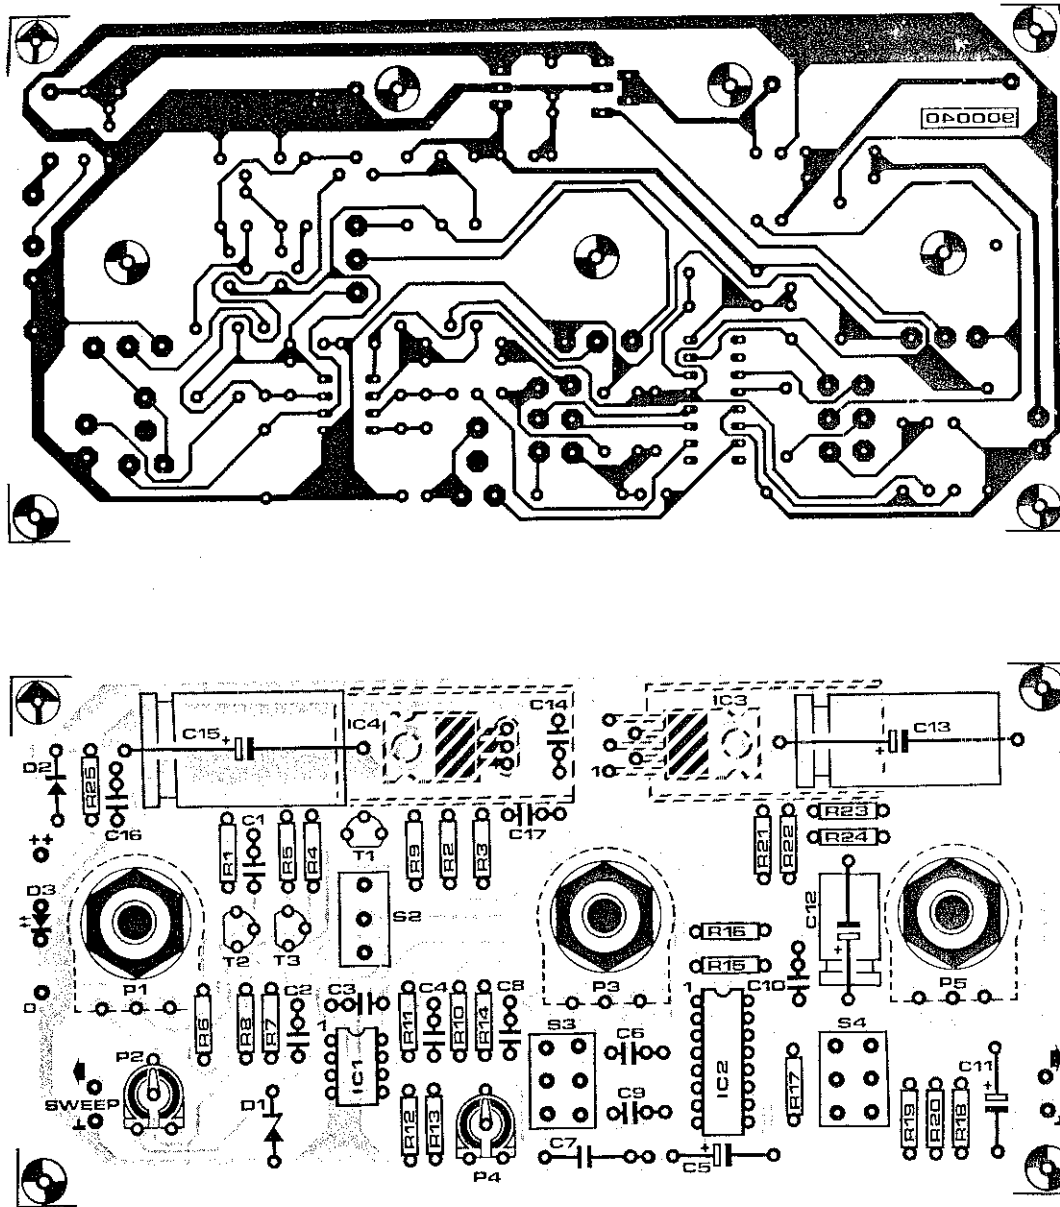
Track layout (mirror image) and component mounting plan of the single-sided printed circuit board for the generator.
